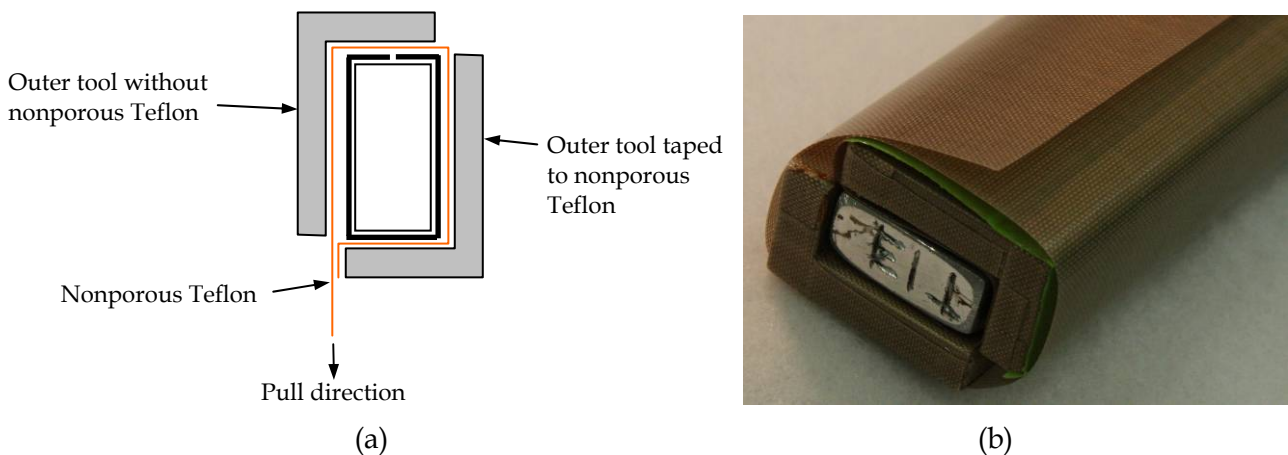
(a) Diagram and (b) photograph of the cross-section of tool setup for vacuum debulking
